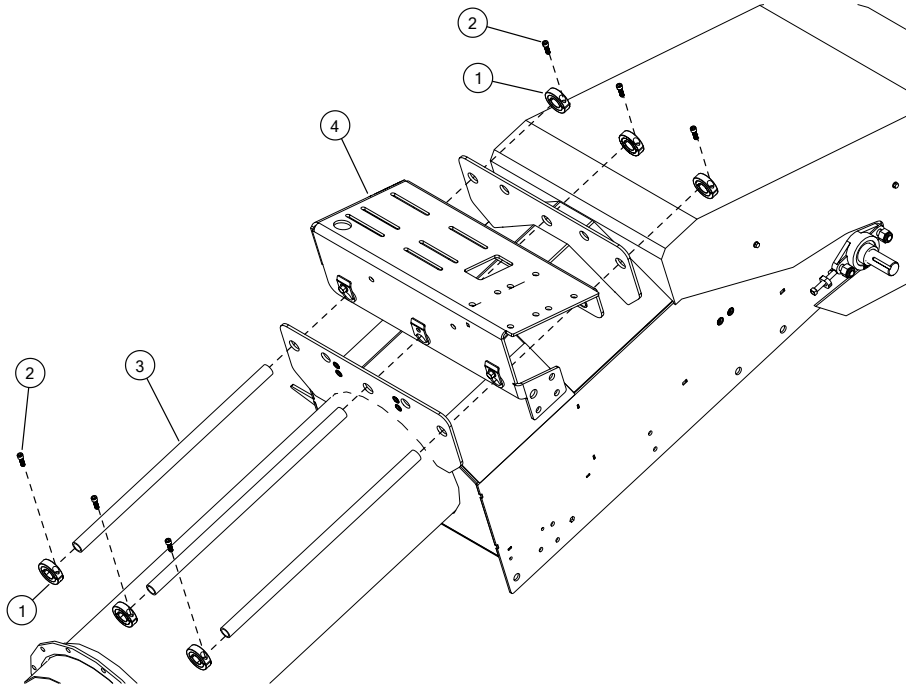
Step 1: Prepare the Motor and Gearbox Mount
